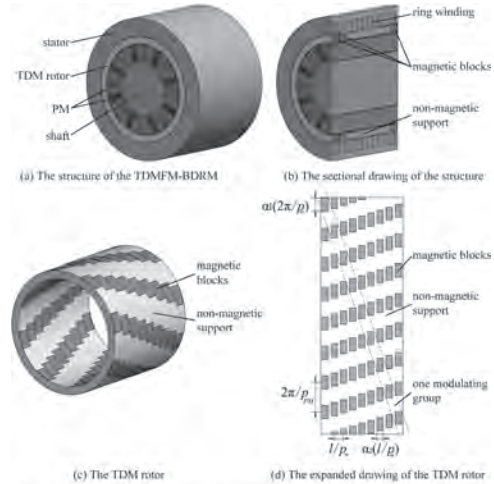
The structure, sectional drawing, and expanded drawing of the TDMFM-BDRM
